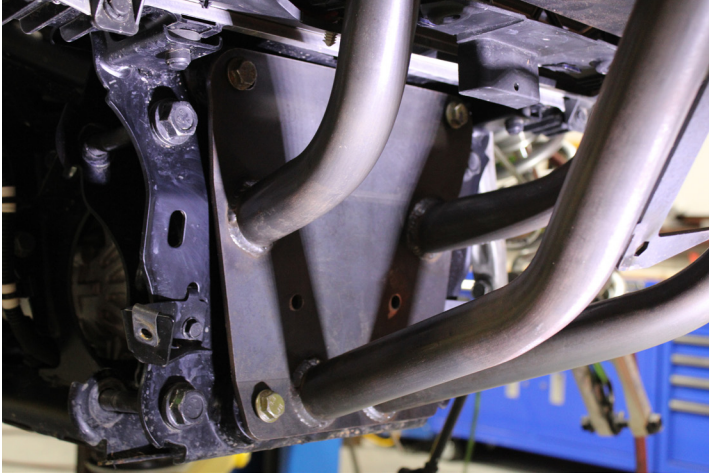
Mount bumper using 15mm Socket and factory hardware
